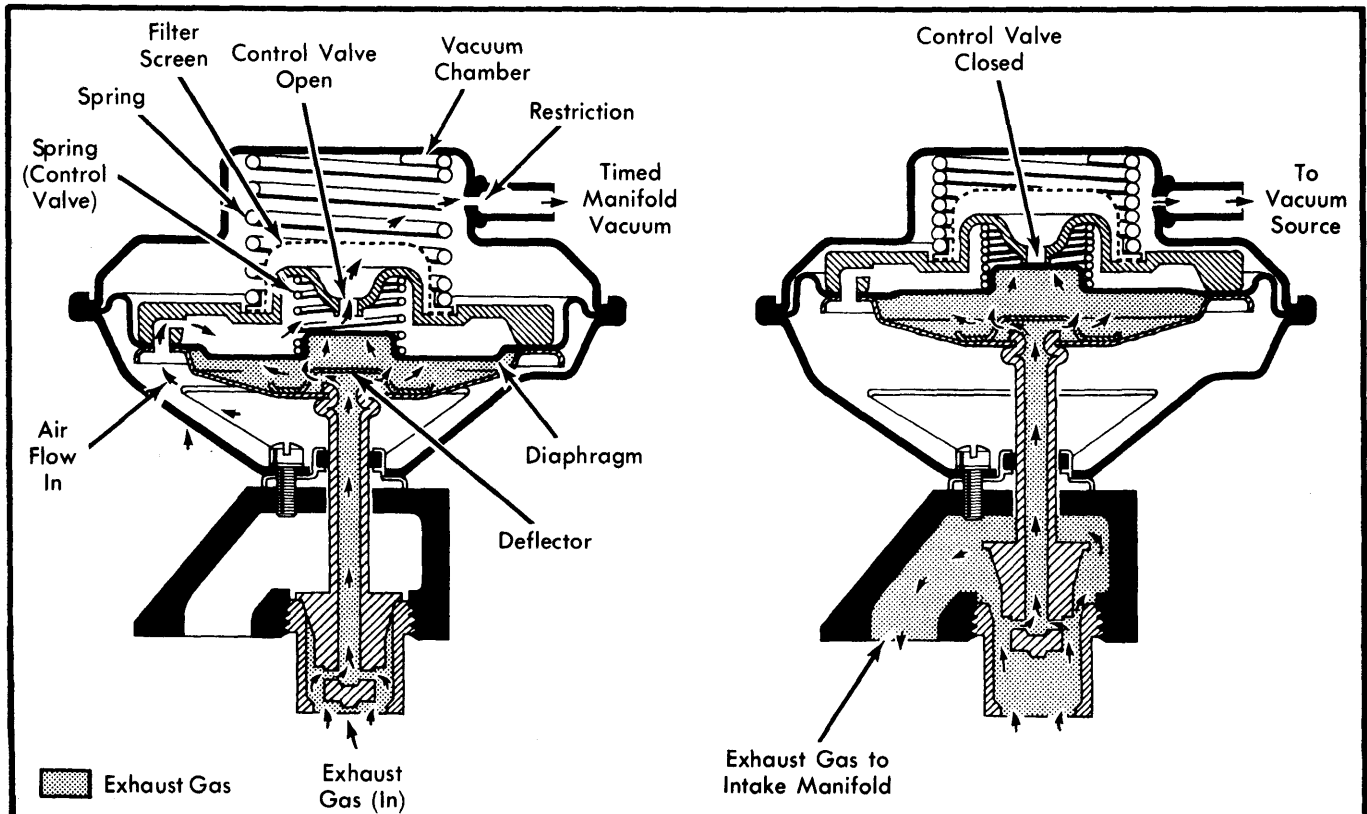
Cutaway View of Positive Back Pressure EGR Valve
